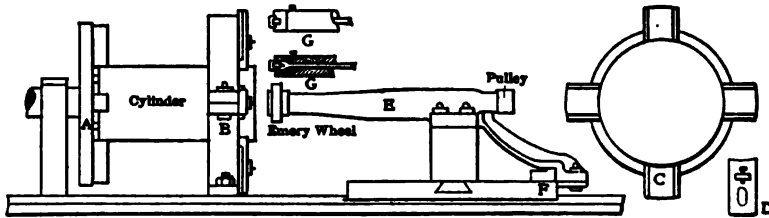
Grinding Fixture for Gas Engine Cylinders.
